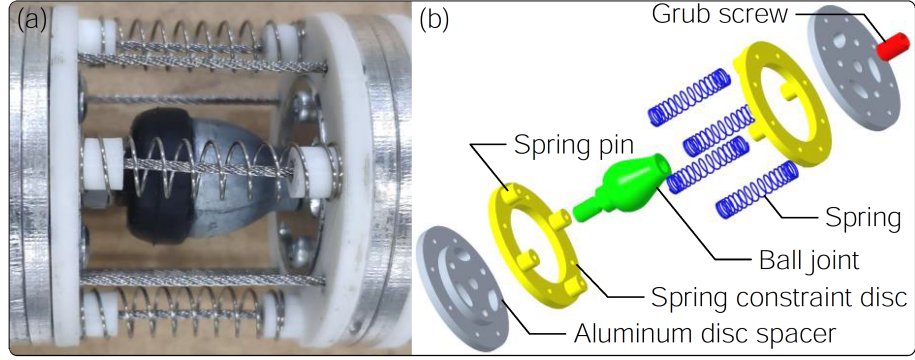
A support spine segment. (a) assembly photo. (b) exploded-view drawing.
